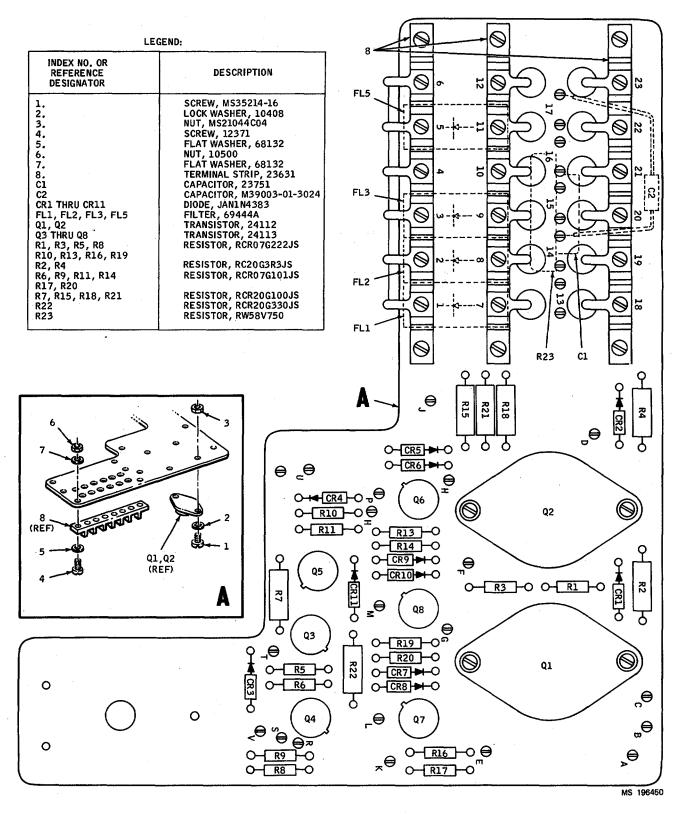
Printer Driver Board Assembly (73261A), Parts Location
